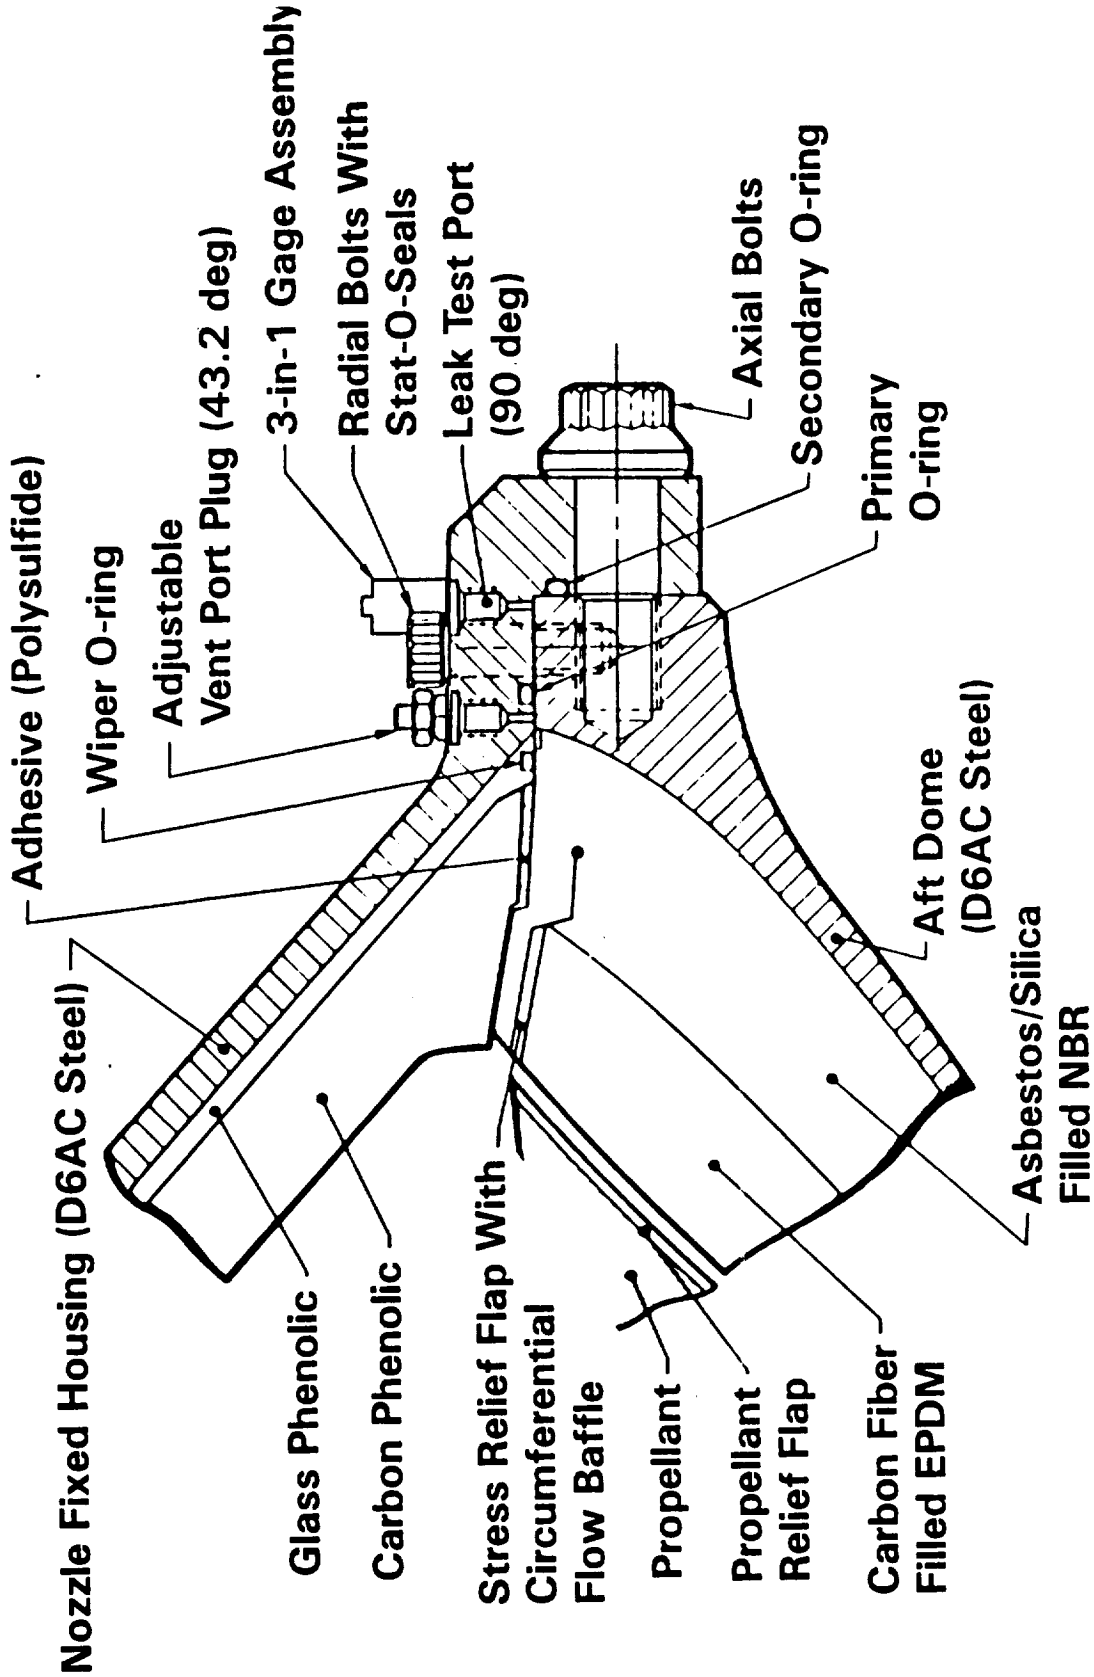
QM-8 Assembled Nozzle-to-Case Joint
